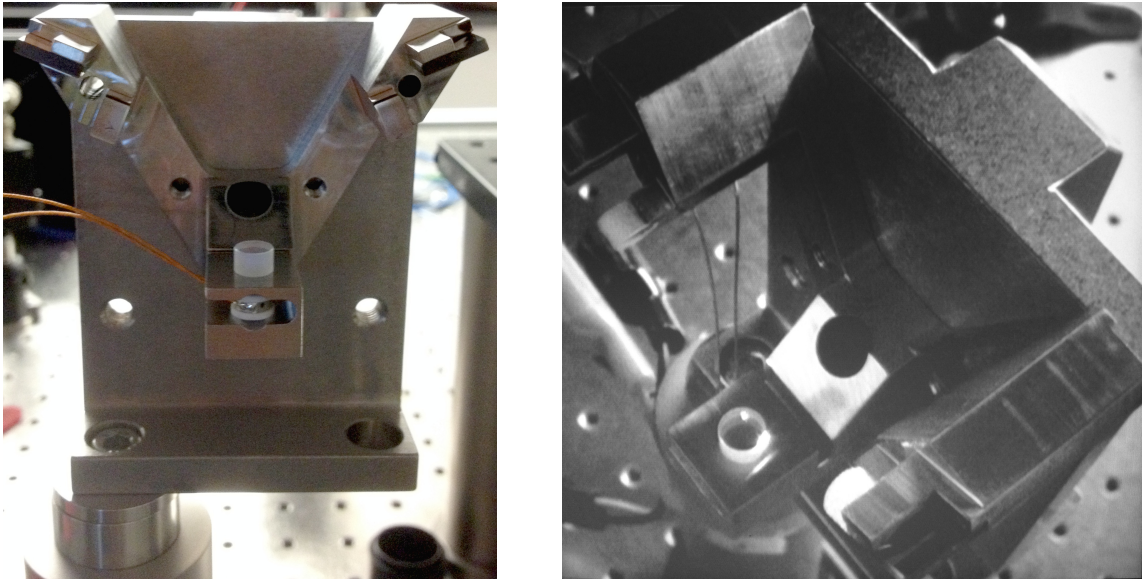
Photograph showing mounting bracket being used to glue the second steering mirror.
